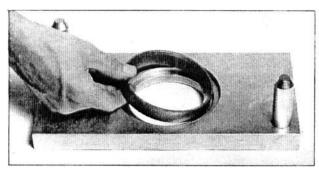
Bearing Cup Position in Special Tool MFN-267Y
